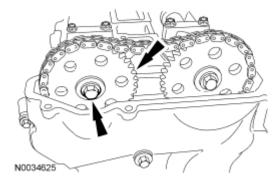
Locating Exhaust Camshaft Drive Gear And Bolt Courtesy of FORD MOTOR CO.
